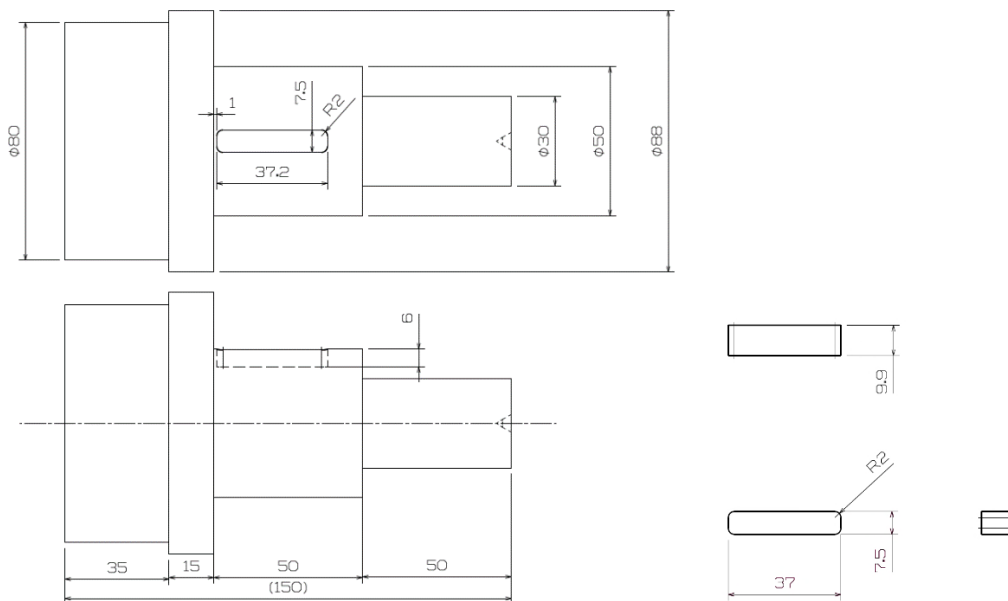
Drawings of jig and key for CFRP orthogonal cutting
